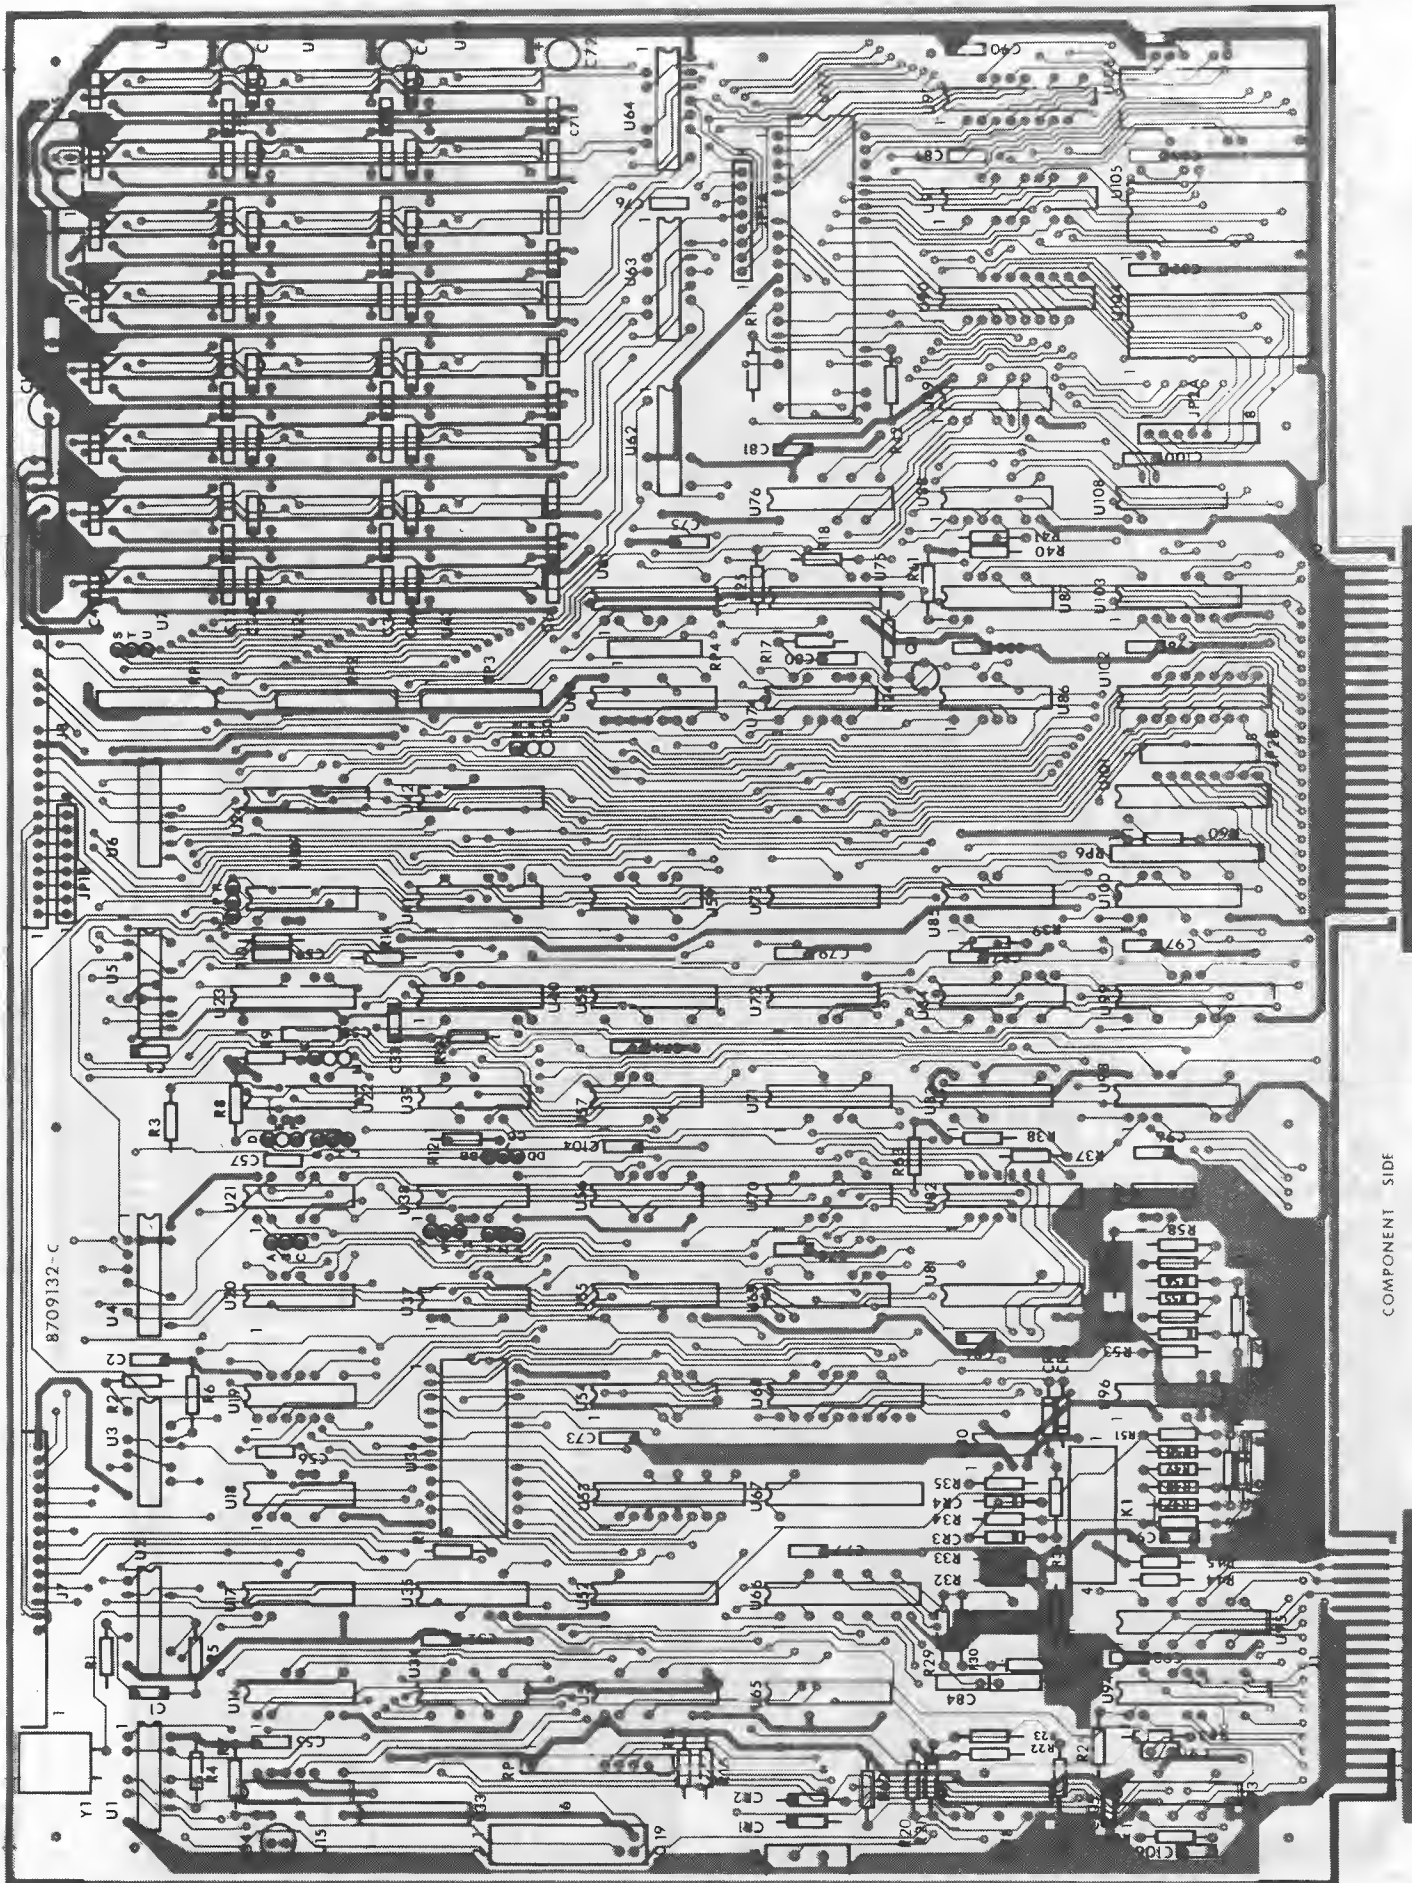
CPU PRINTED CIRCUIT BOARD — COMPONENT SIDE
